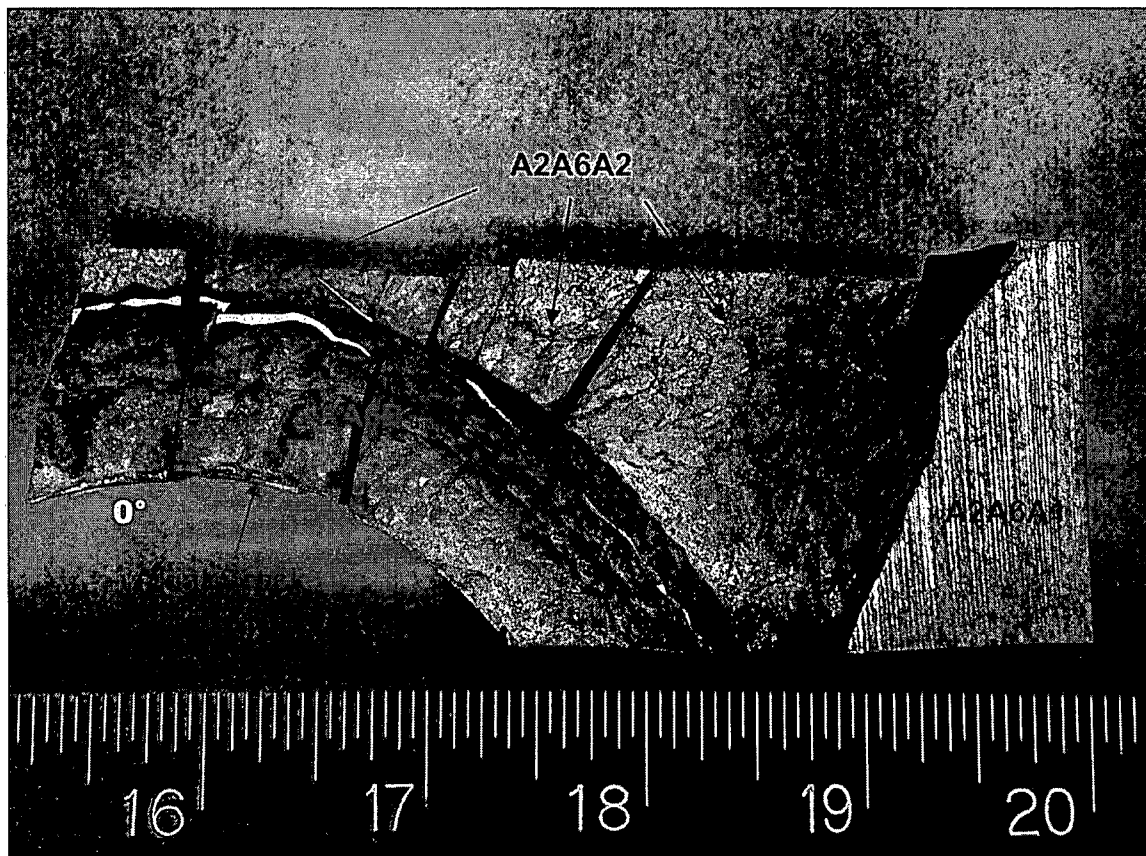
Piece A2A6 was first sectioned into Pieces A2A6A and A2A6B. Piece A2A6A was further sectioned into Pieces A2A6A1 and A2A6A2. Both cuts were made on the same plane, parallel to the paper. The first cut line is partially visible; Piece A2A6B is the upper portion of the weld. The second cut line between Pieces A2A6A1 and A2A6A2 is obscured by Piece A2A6A1
